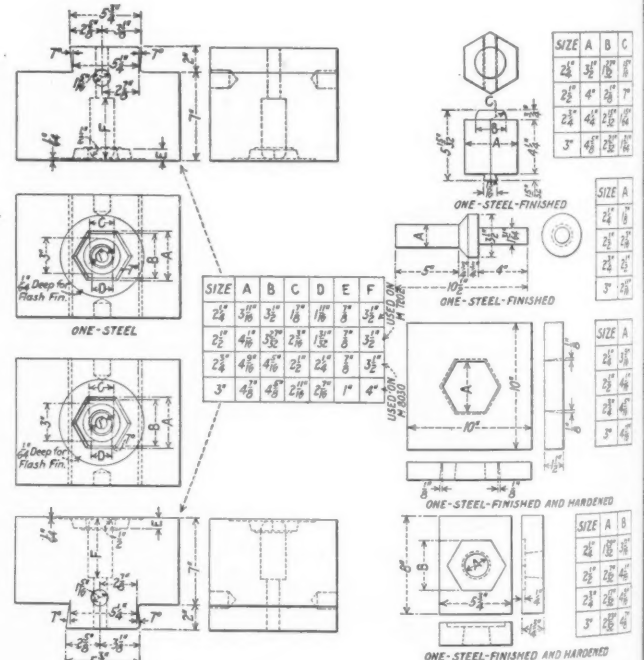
Forming and Trimming Dies for Making Hexagon Nuts
